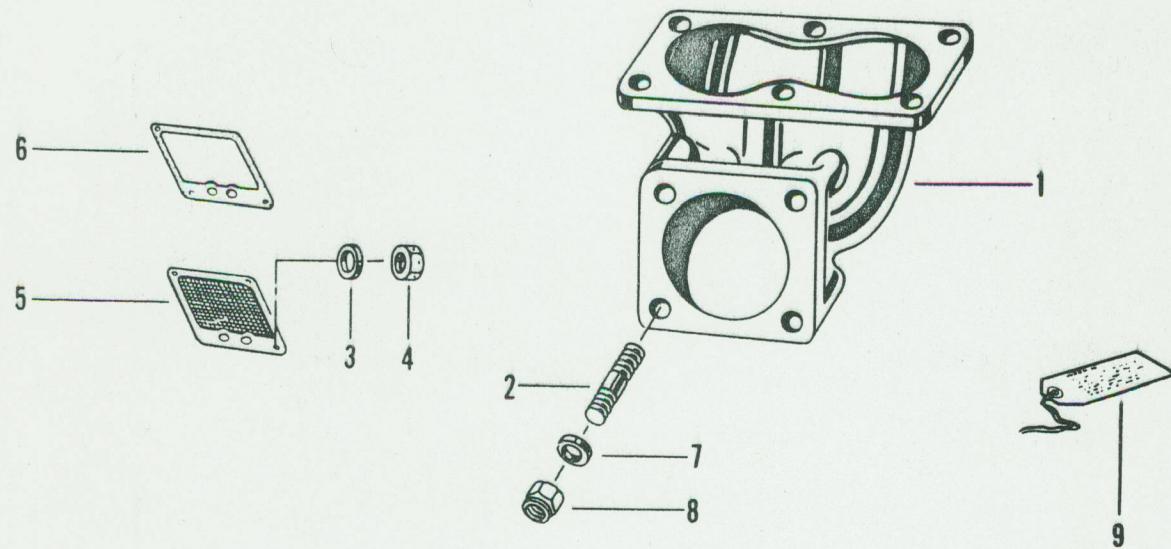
Carburetor Attaching Parts and Packing Case - Collapsible
